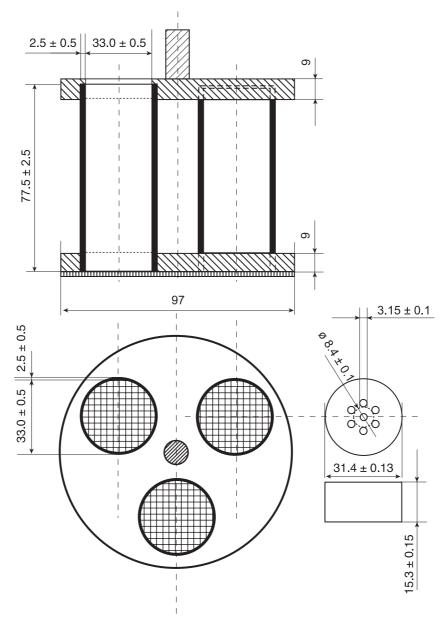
2. – Apparatus B Dimensions in millimetres
